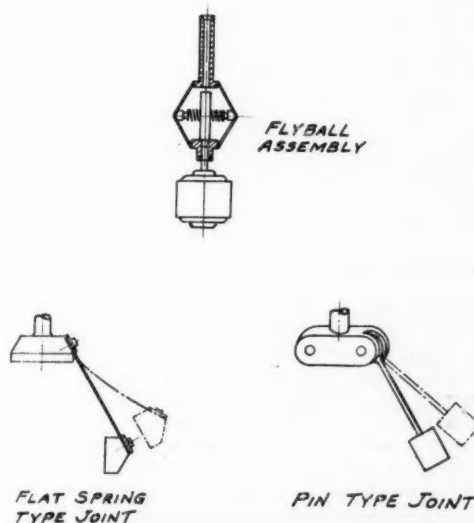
Centrifugal-type flyball assembly and joint construction between structural members
